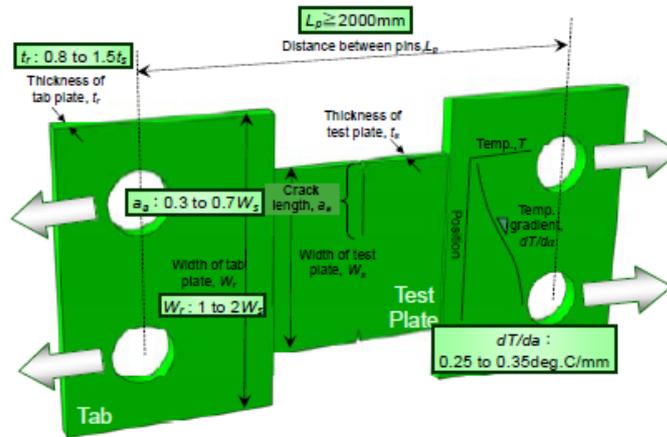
Proposed crack arrest testing conditions, Kawabata *et al.* (2010).
